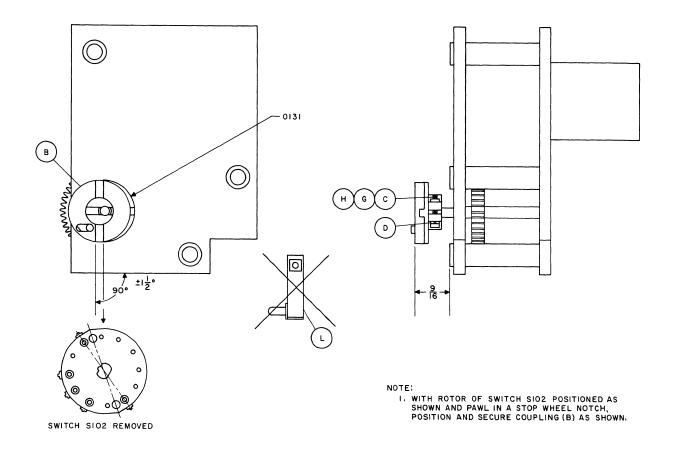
Installation of Oldham Coupler and Autopositioner Assembly
